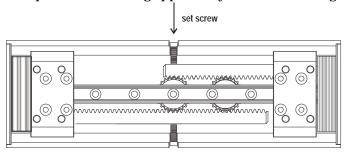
Cut-away front view of the inside of the gripper, showing the brass set screws.
